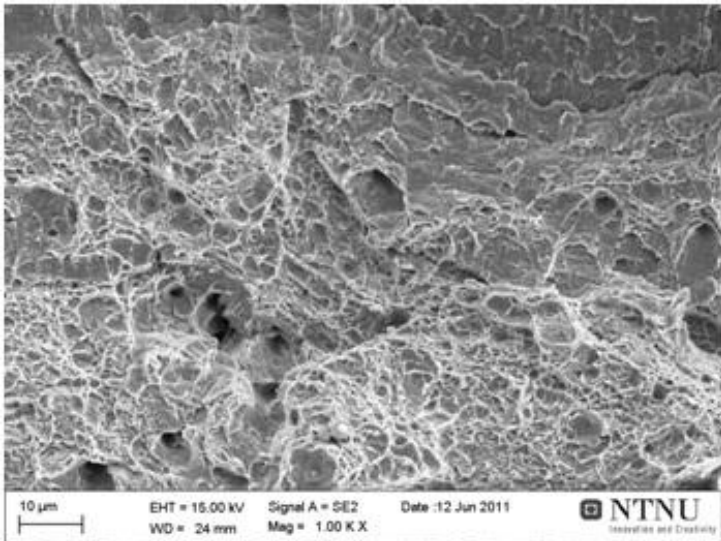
Fracture surface of charpy specimen 9 at 1000x magnification.
